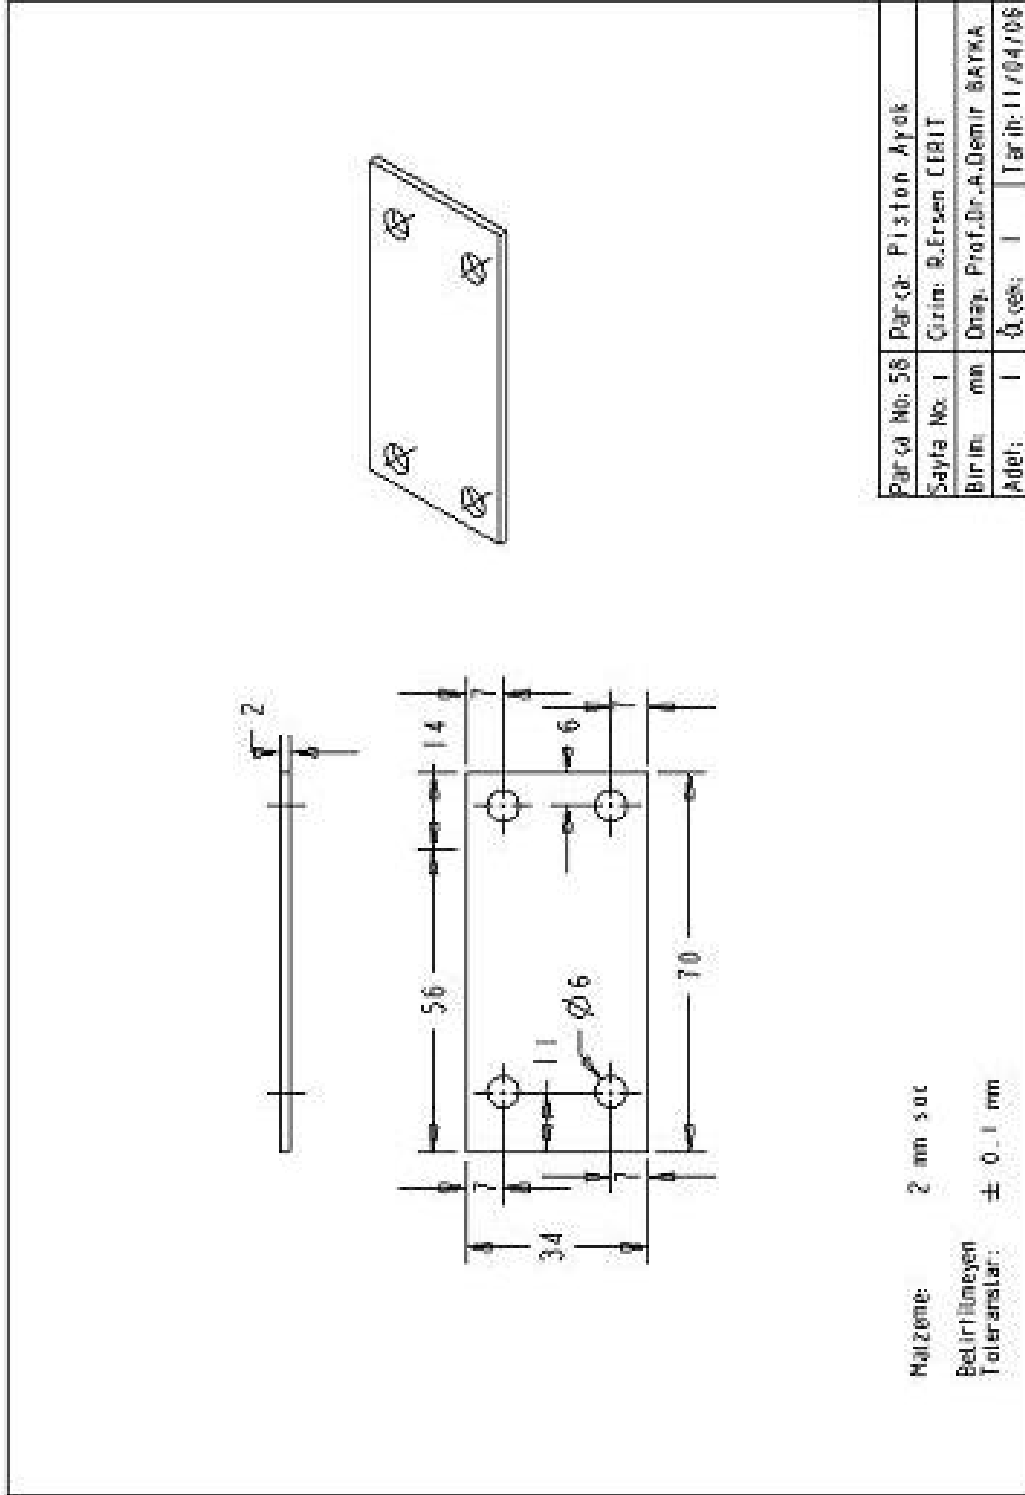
Technical Drawing of Piston Support on Indicator Board.
